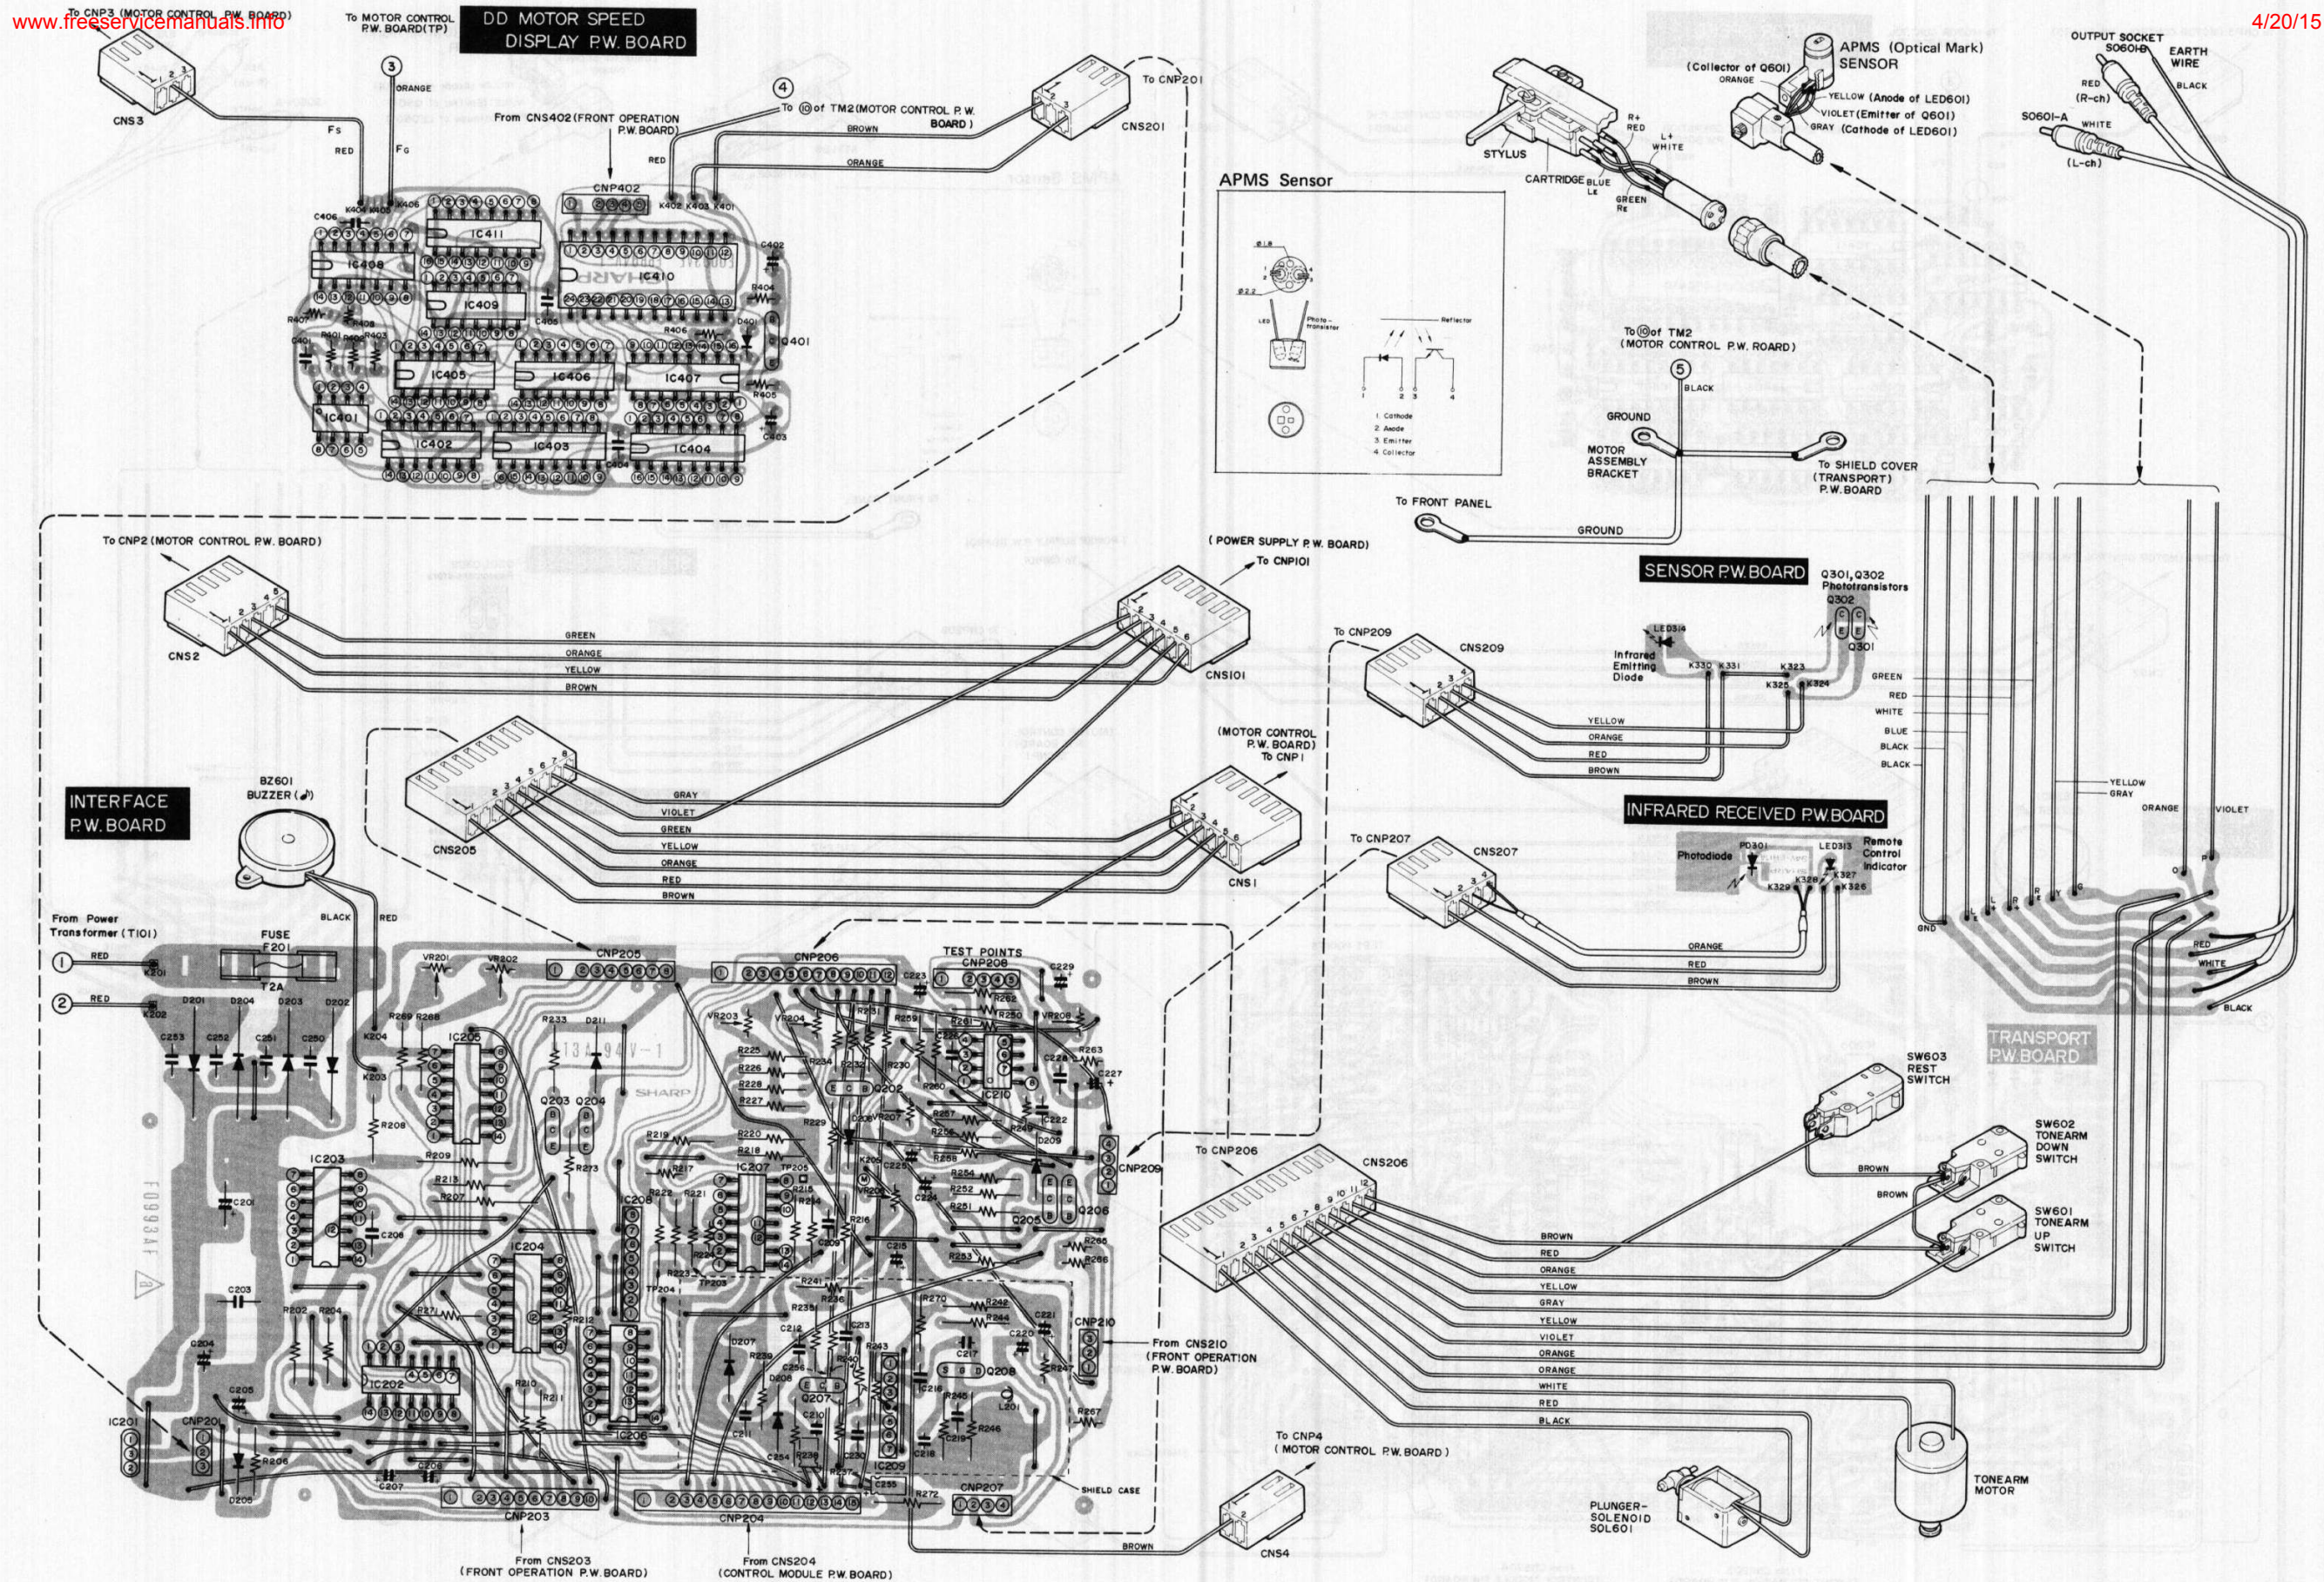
(NEW) WIRING SIDE OF DD MOTOR SPEED DISPLAY P.W. BOARD, INTERFACE P.W. BOARD AND TRANSPORT P.W. BOARD
